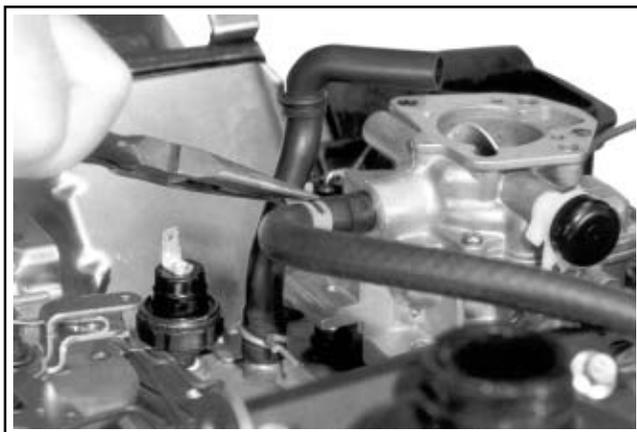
Disconnecting Fuel Inlet Line at Carburetor.
